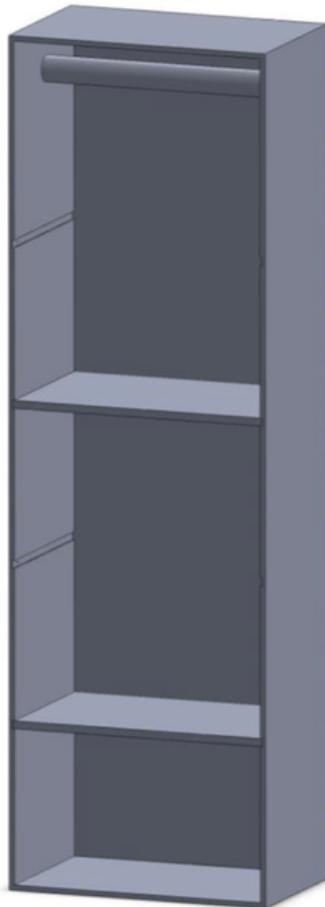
Isometric 3D CAD model of storage space located behind the driver and passenger seats.
